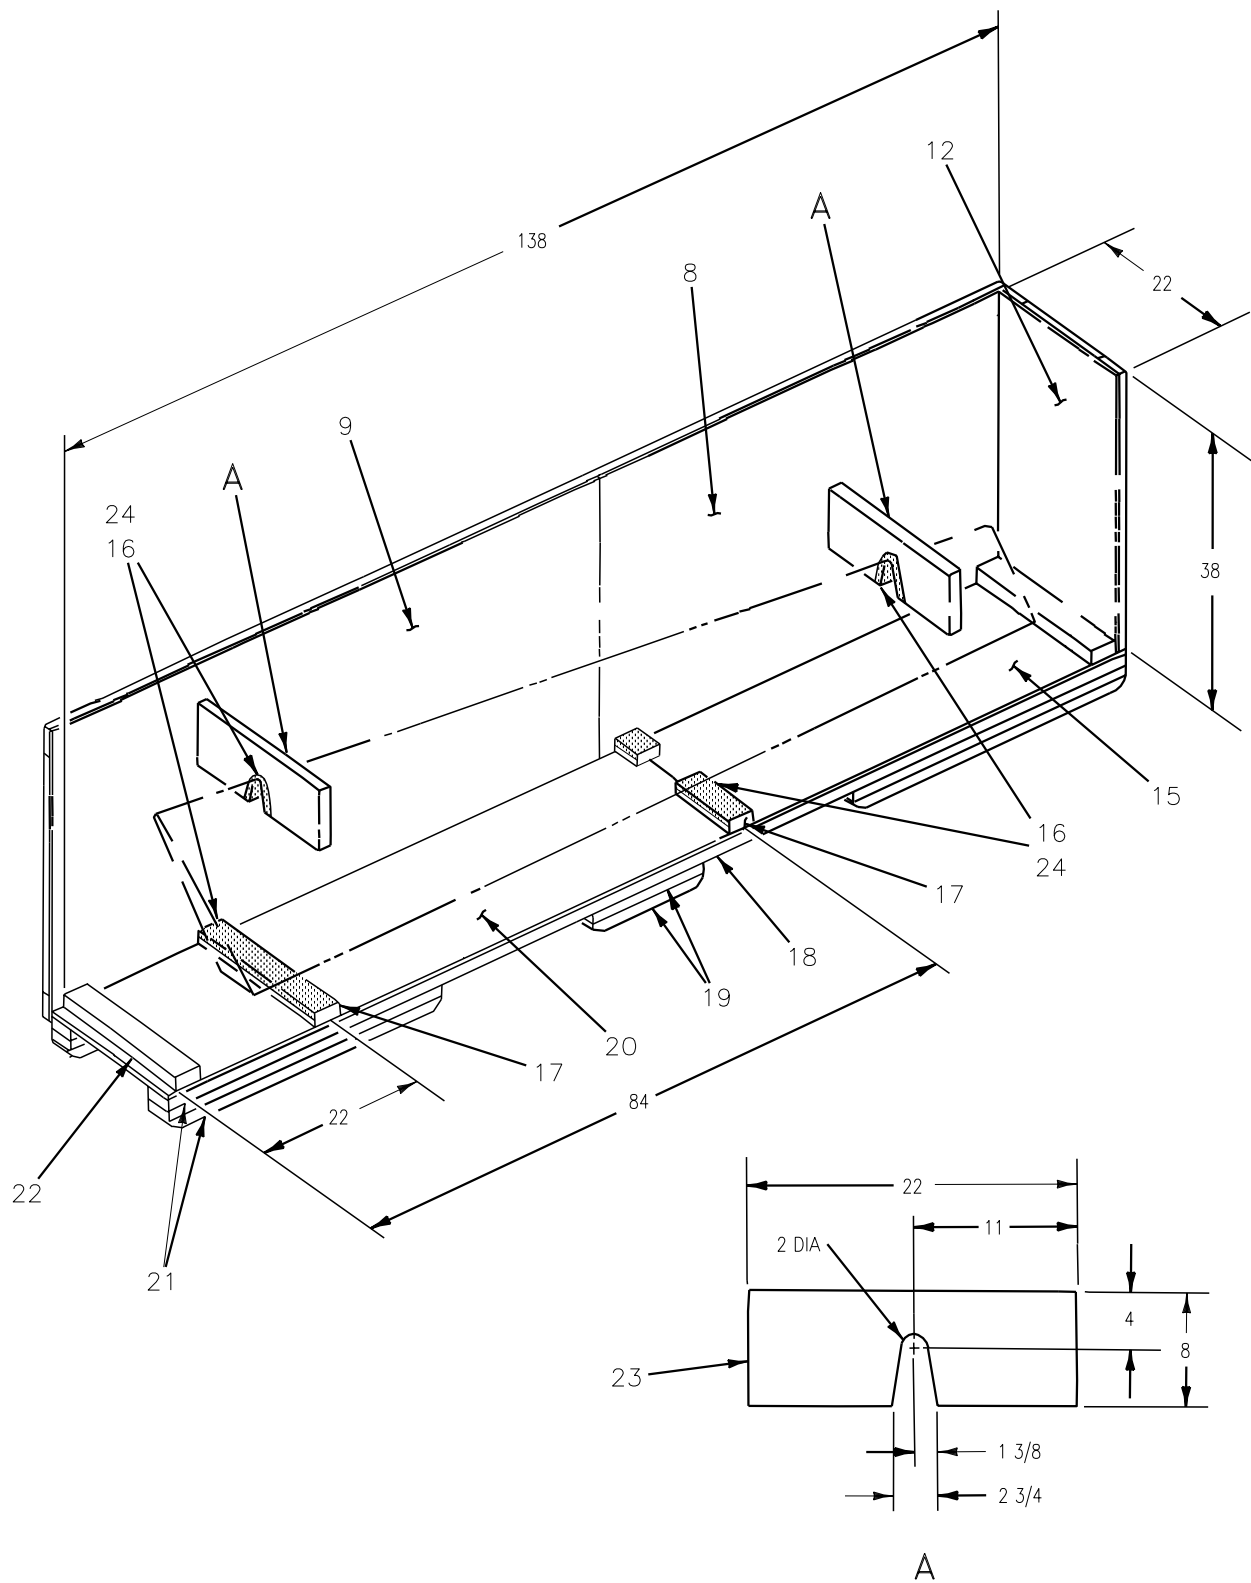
Inboard Leading Edge Flap Shipping Container (Sheet 2)
